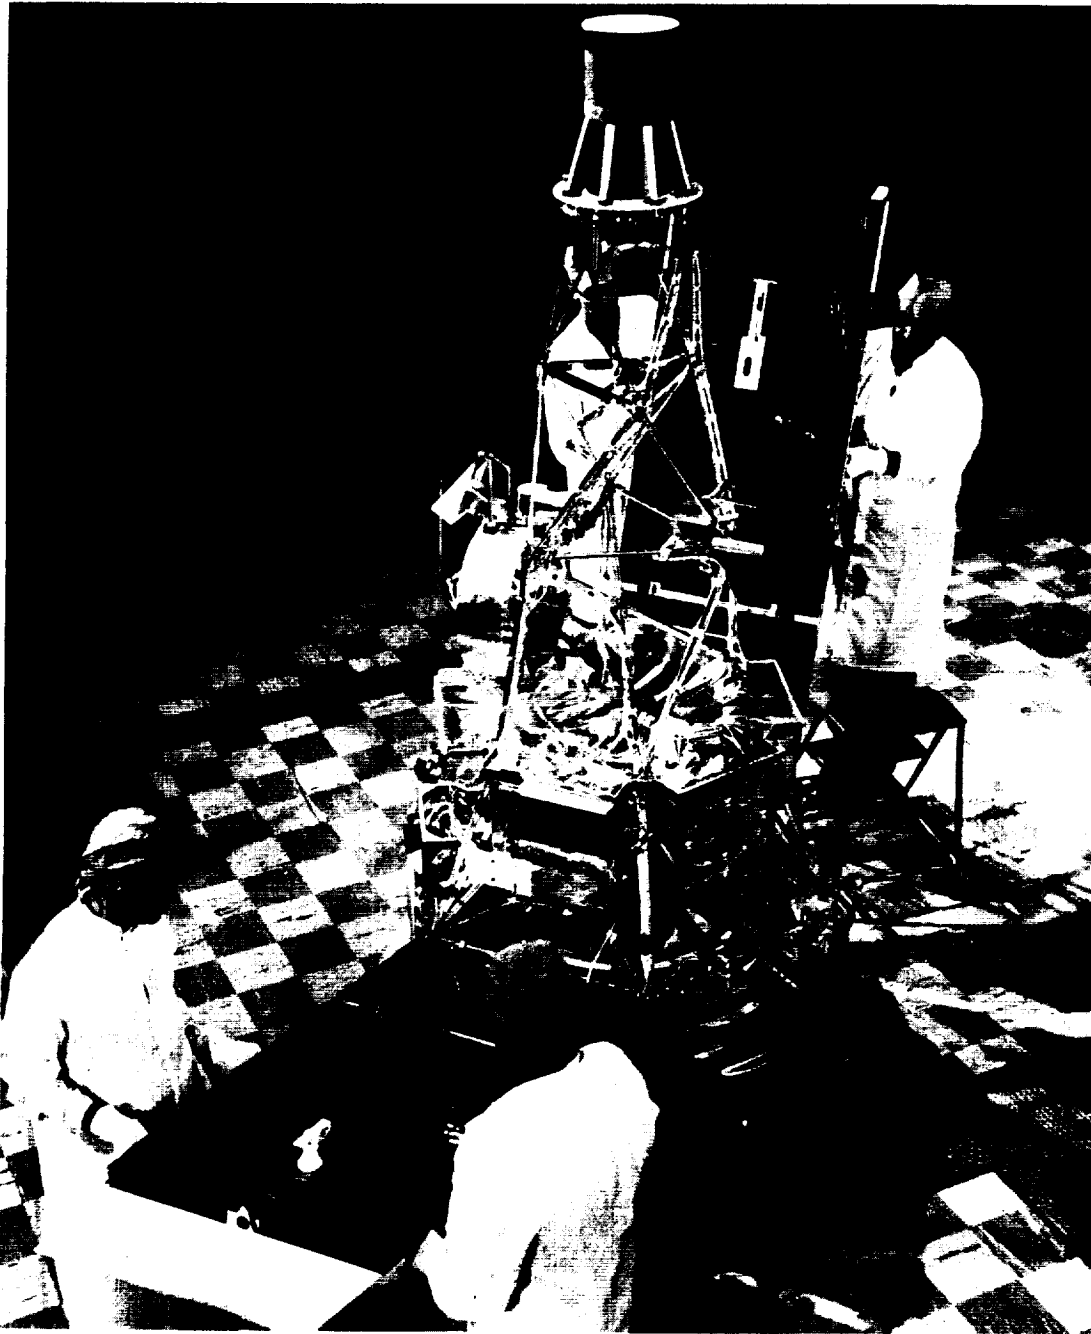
Attachment of solar panels, a final step in assembly of Mariner II.
